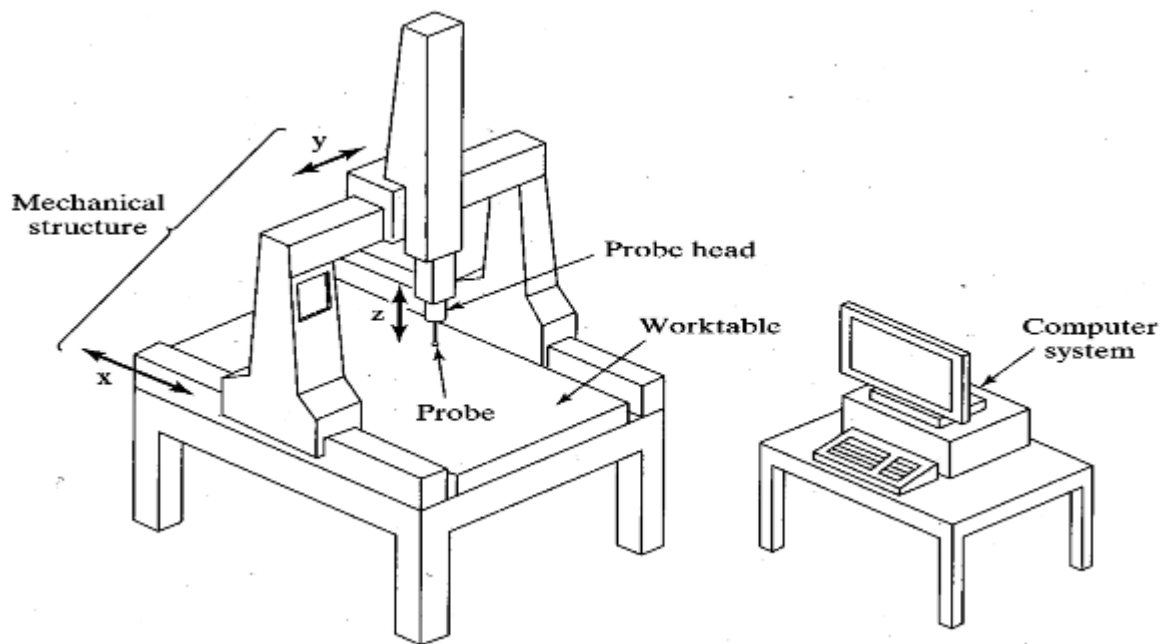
CO-ORDINATE MEASUREMENT MACHINE
